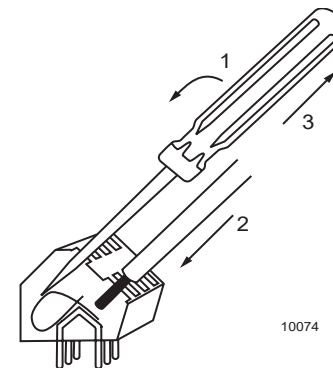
Cage clamp terminals (standard). Use 0.5 to 2.5 mm² (AWG 20 to 12) solid wires or stranded wires, depending on local requirements.
